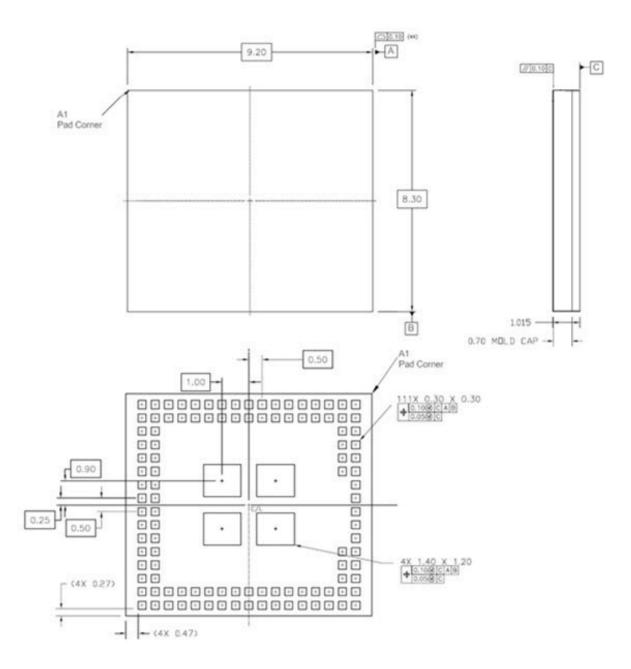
AR6103 Package Dimensions Top and Side Views
